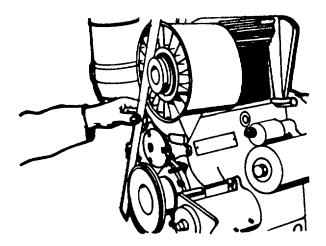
Checking V-Belt Pulley Alignment 4-82
